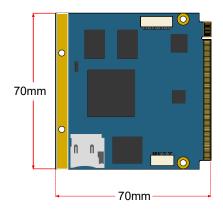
Dimensions of the VIA QSM-8Q60 module (top view)
